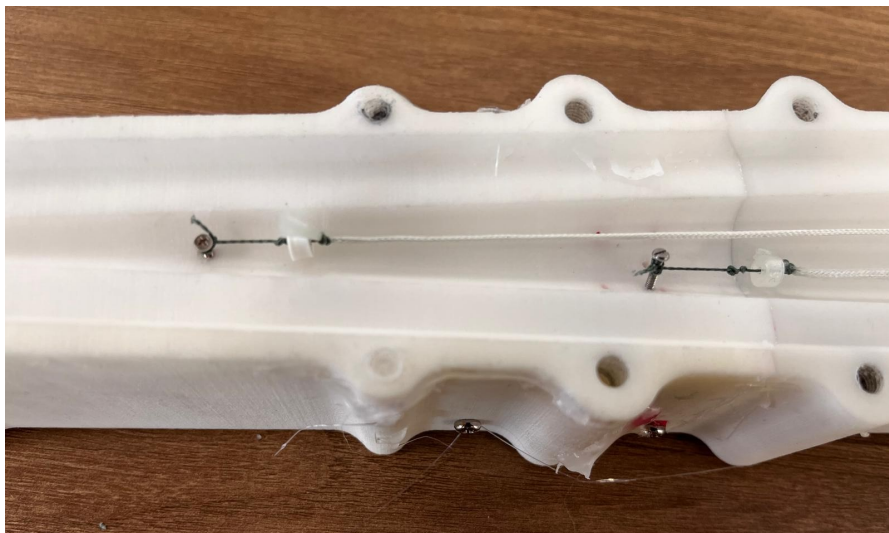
Detail of the tendon anchoring and termination system used in the prototype.
